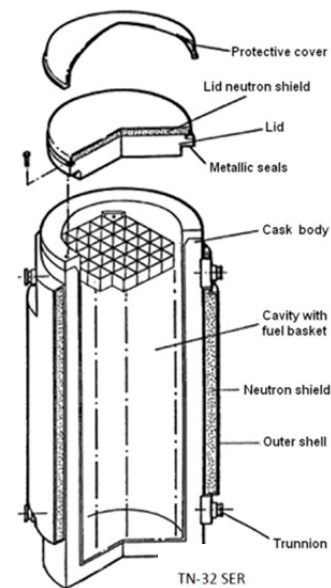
Components of the Transnuclear TN-32 dry shielded canister assembly
